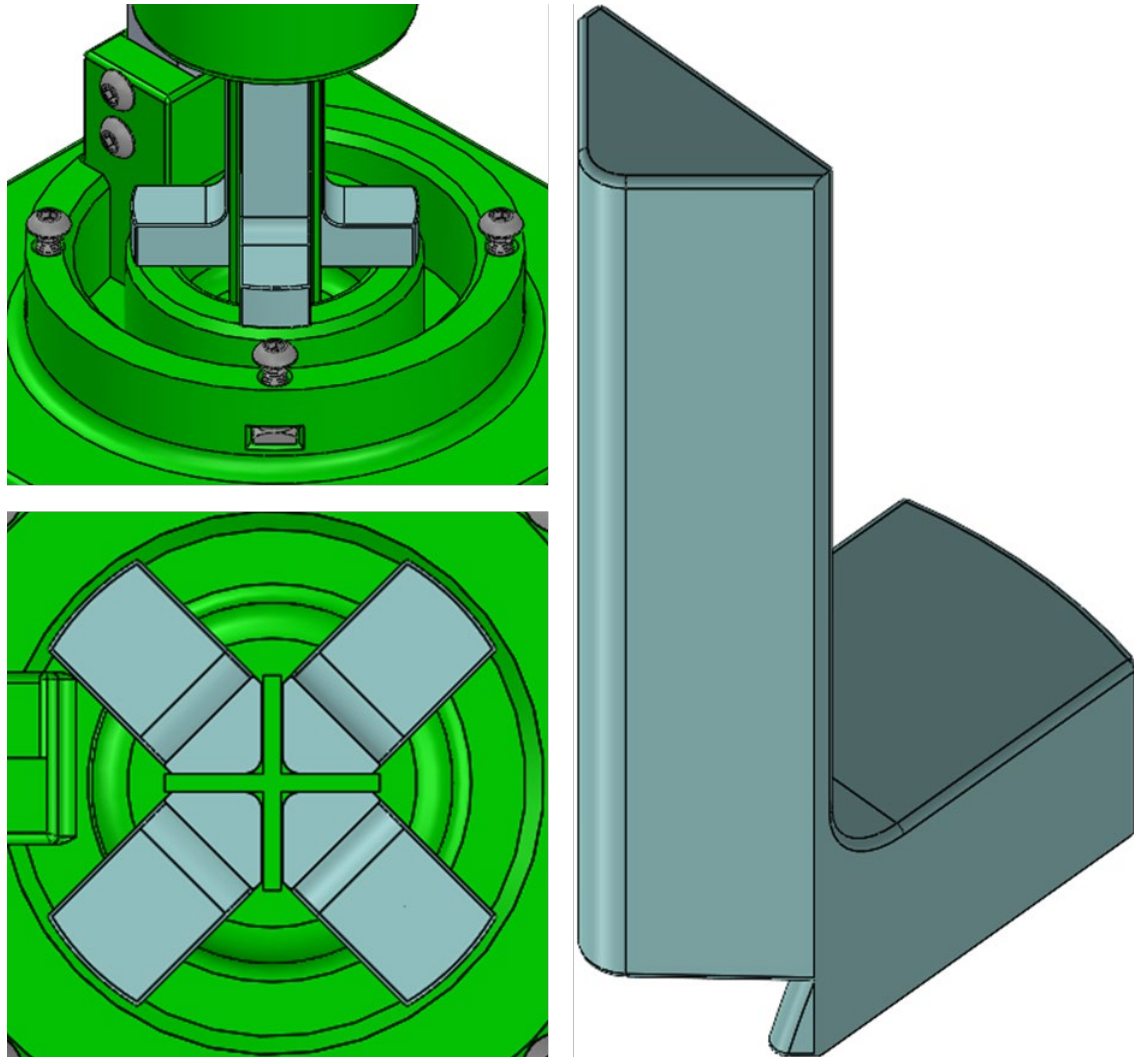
CAD of the version 2 flexure locks showing how they change the cross section.
